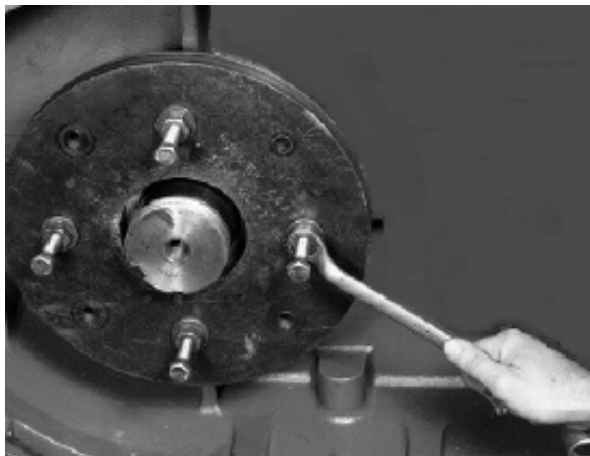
26 – PRESS PLATE & JACK SCREW ASSEMBLY
